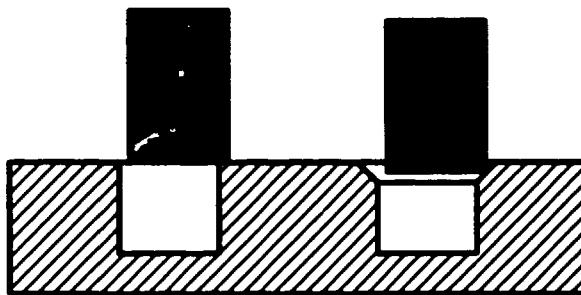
Design for assembly has great impact. The chamfer can guide the peg into the hole.
